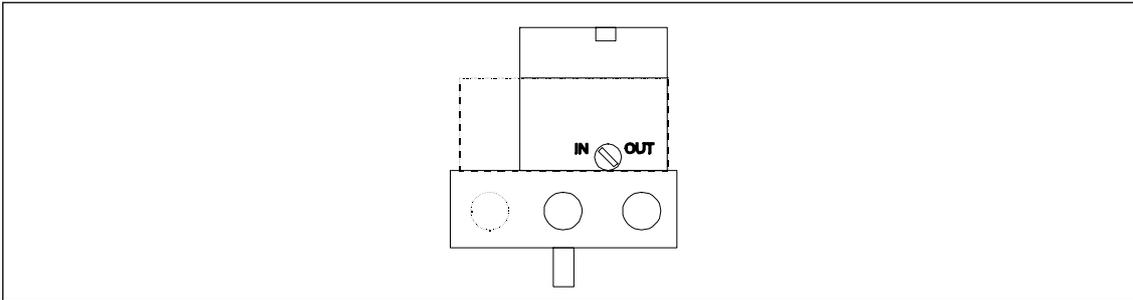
Purge air switch on the valve block, view of the positioner onto pneumatic connection side with cover open
